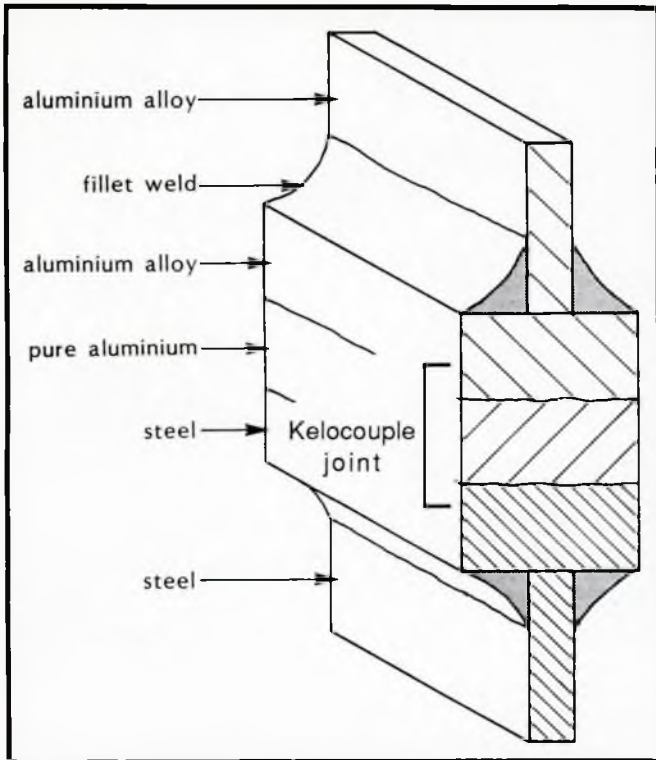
Geometry for the assembly of structures by means of explosion-bonded transition joints
